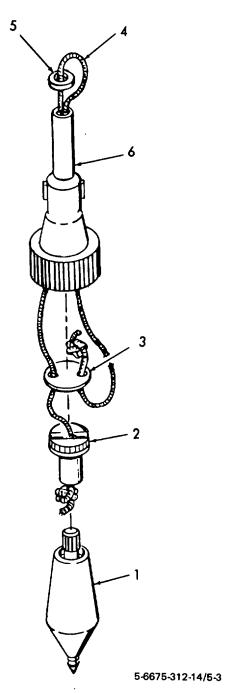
Plumbbob assembly, disassembly and reassembly
